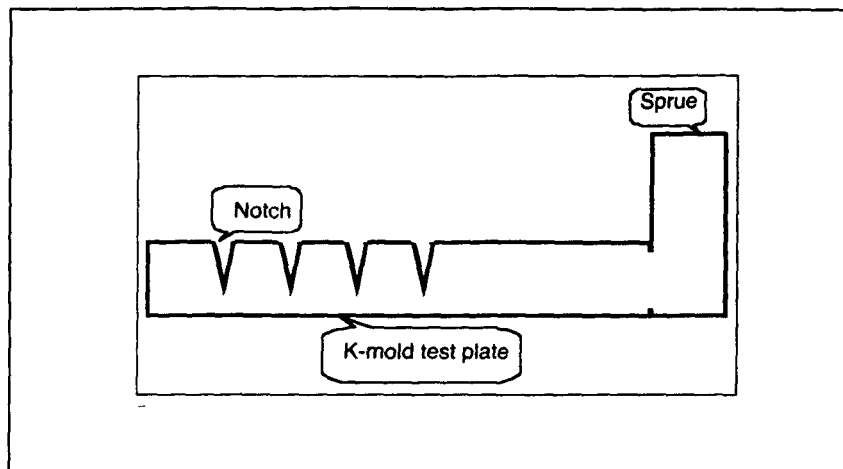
Schematic diagram of K-Mold fracture plates [10].
